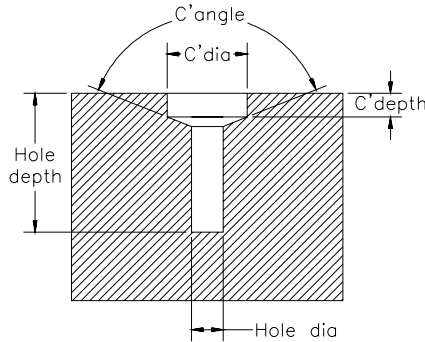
Sectional view of counterdrilled hole Figure 5-13 Spacer plate with counterdrilled holes
